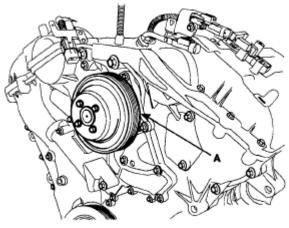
Identifying Water Pump And Gasket With Bolts Courtesy of HYUNDAI MOTOR CO.
